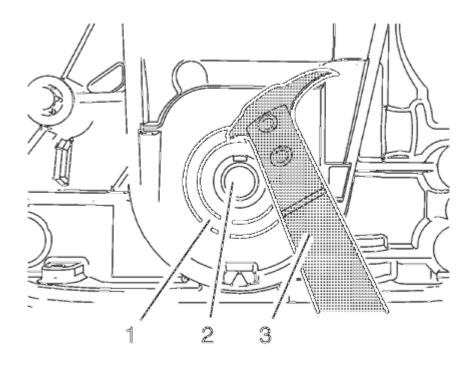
Aligning Timing Chain & Crankshaft Sprocket Courtesy of GENERAL MOTORS COMPANY
